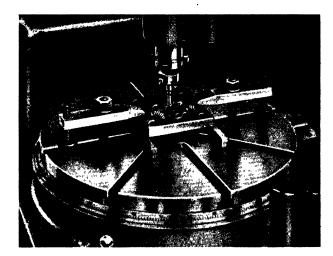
JIG BORING WITH A CARBIDE-TIPPED TOOL (A. C. Wickman, Ltd.)
